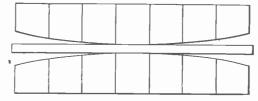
METHOD OF WINDING SECTIONS OF LARGE COIL
